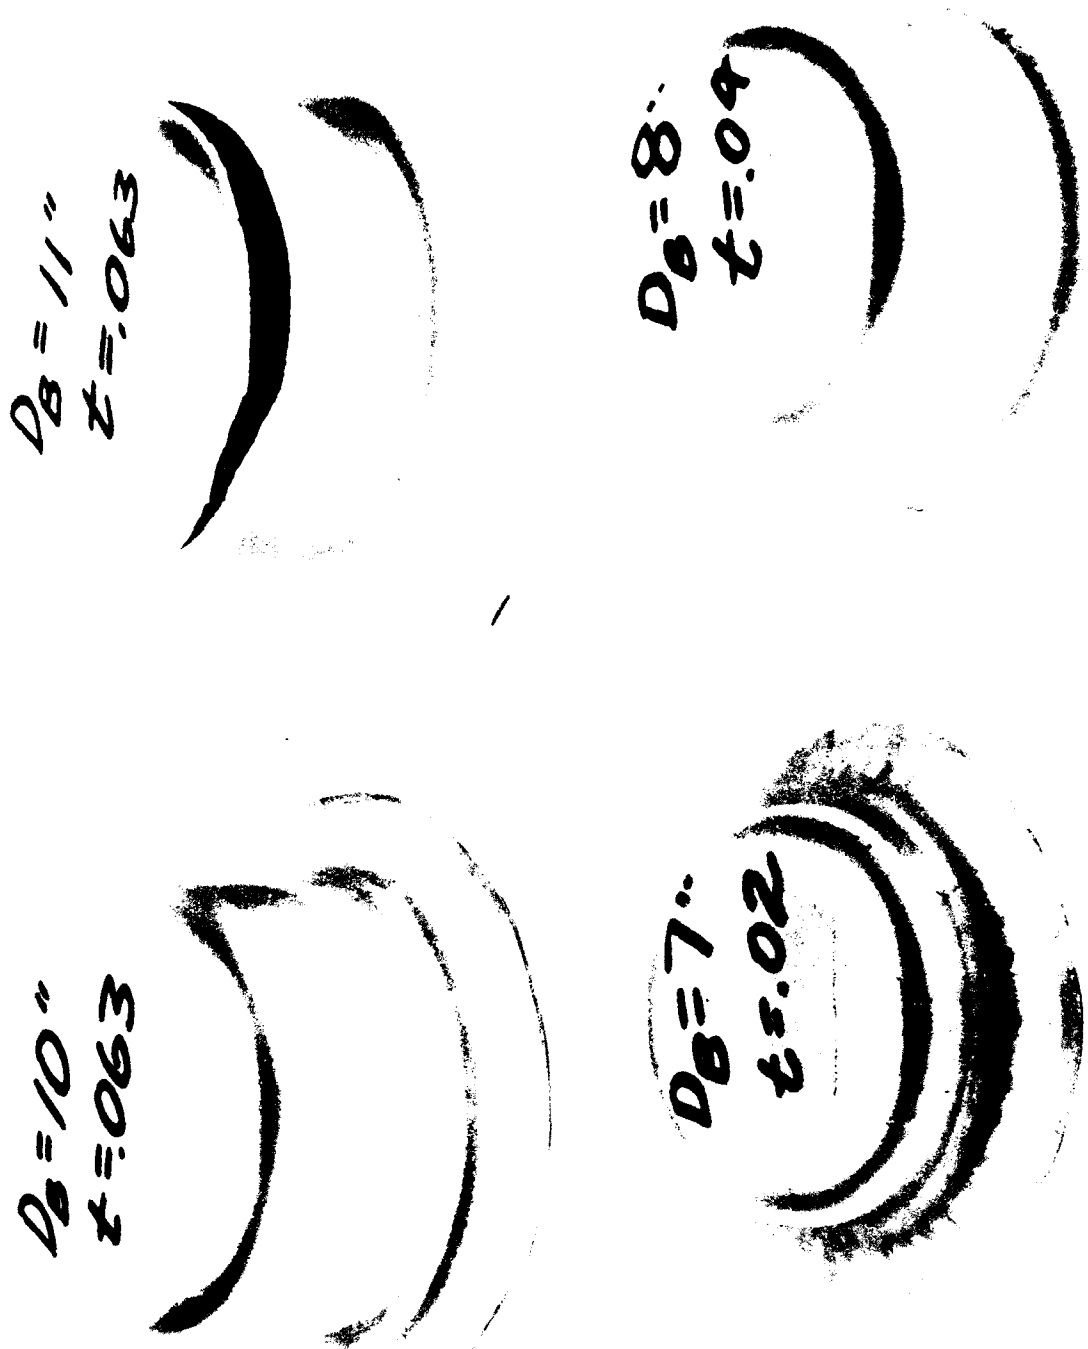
BUCKLING AND SPLITTING OF DEEP DRAW PARTS
